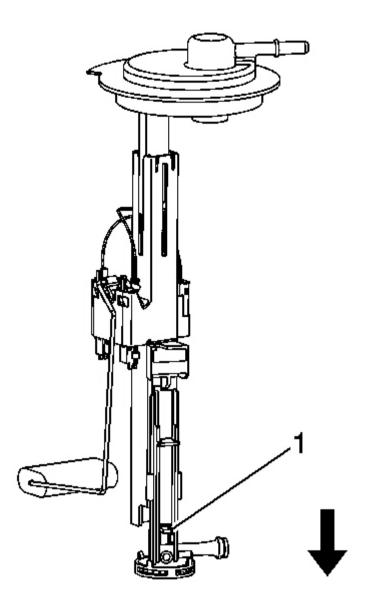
View Of Suction Port Courtesy of GENERAL MOTORS CORP.
